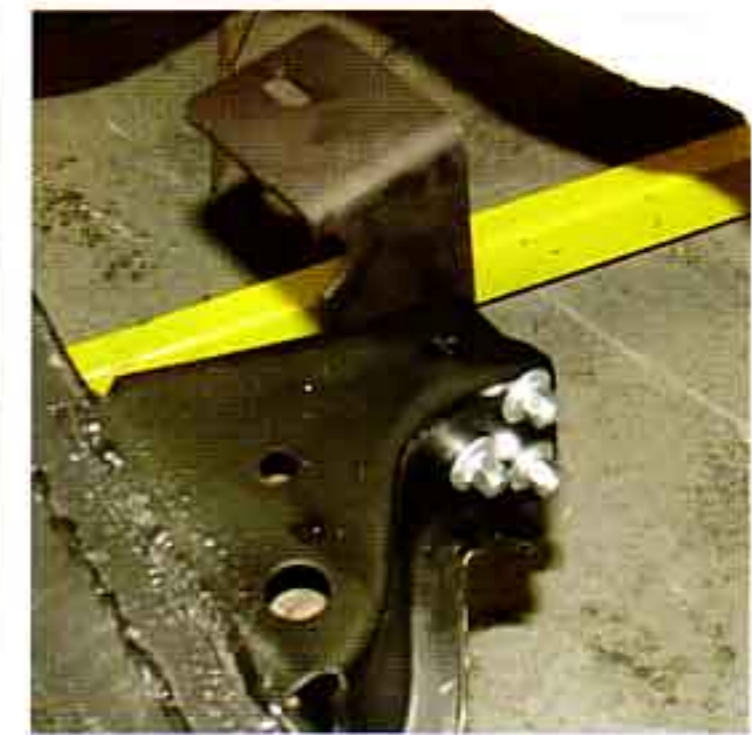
& 6b: The lower half of the new transmission supports bolt to the front of the original frame horns with three 3/8" X 3-1/4" bolts, flat washers, lock washers and nuts. There is a cut-out on the drivers side lower bracket to allow the front emergency brake cable to pass by.
